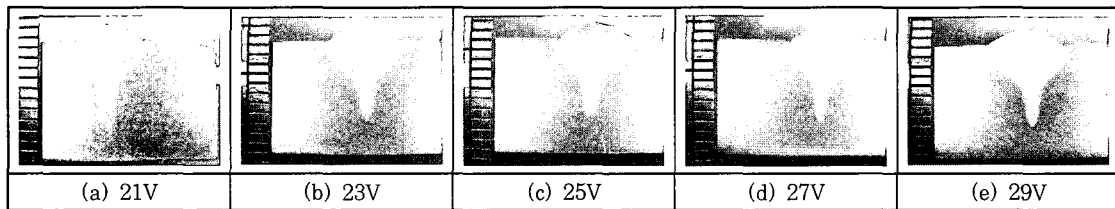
Cross-sectional bead shapes for various weld voltages
